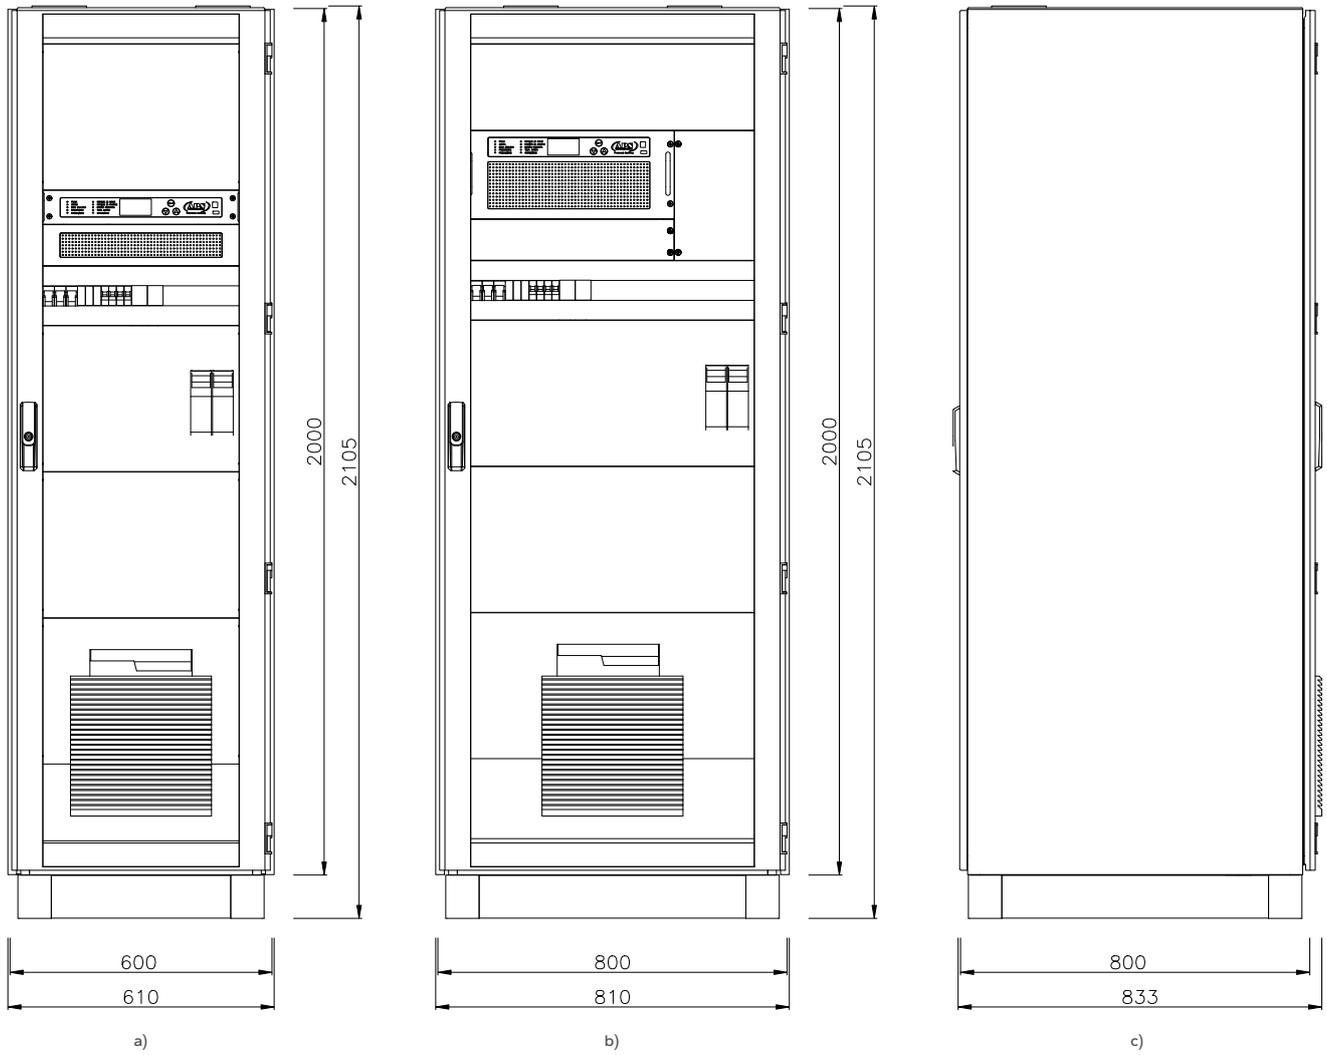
Views with dimensions of the PBI type rectifier cabinet:
